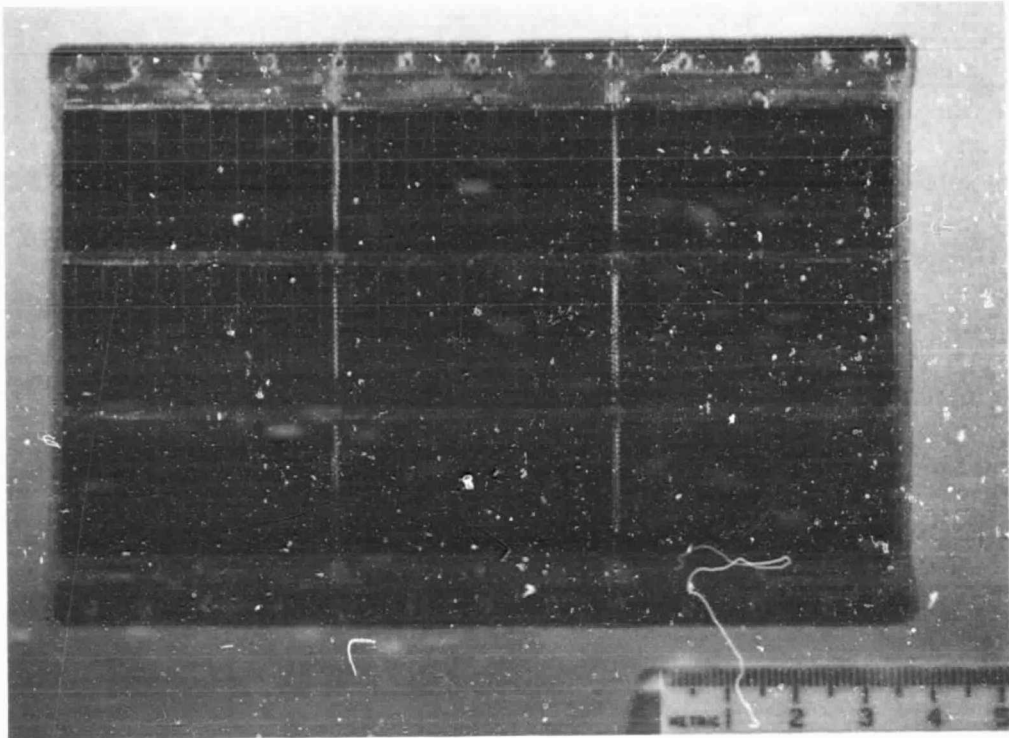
ULTRASONICALLY WELDED MODULE FRONT
